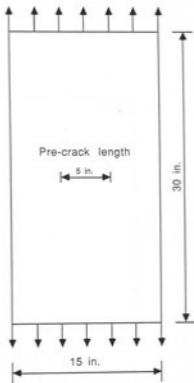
Center Pre-Cracked Rectangular Panel Tension Specimen
